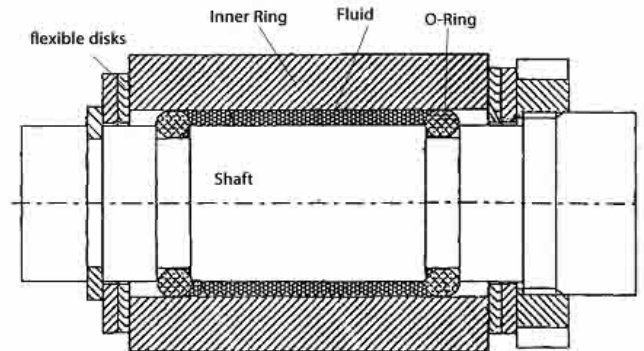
Representation of the inner ring with O-rings and viscous medium [10]
